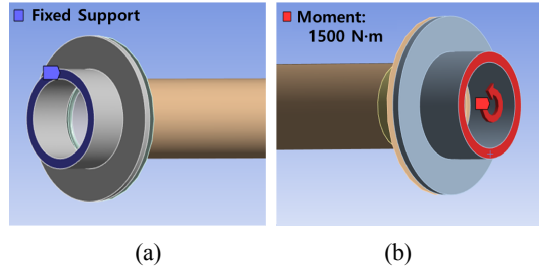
Boundary conditions at (a) fixed end; (b) loading end
